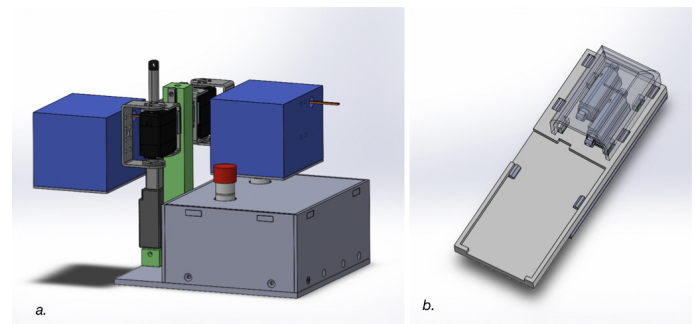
Cap opener and tube holder (a.), Pipette holder (b.)
